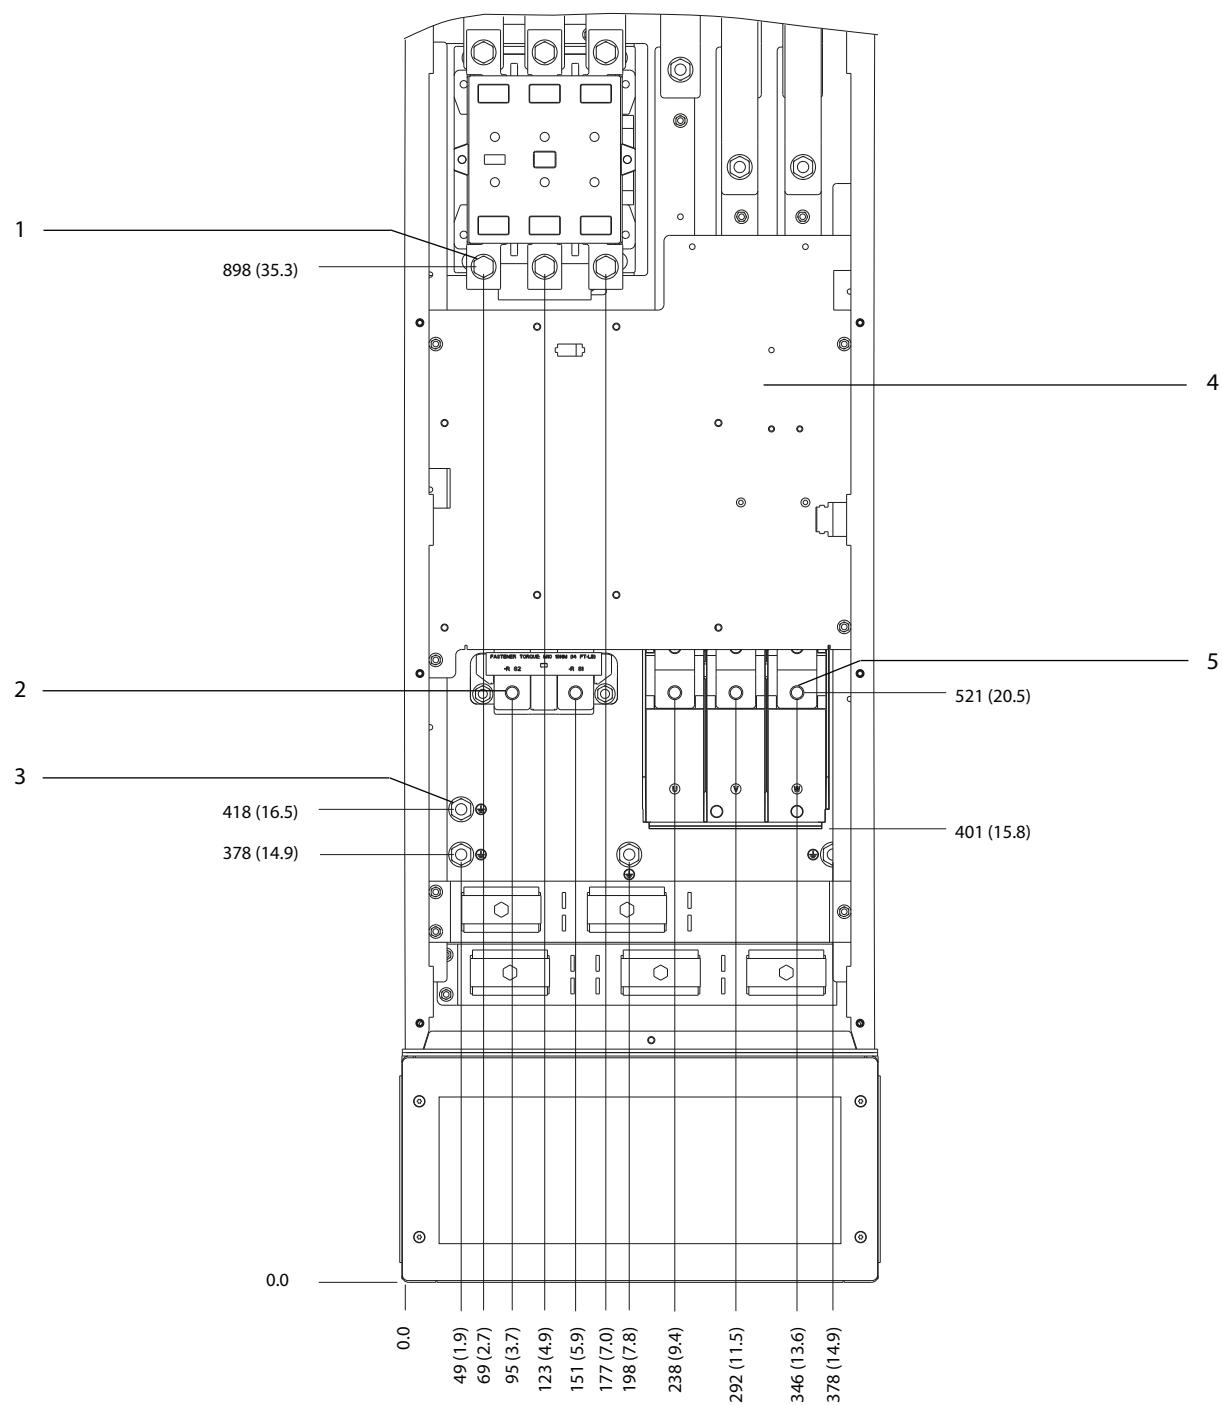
D7h Terminal Dimensions with Brake Option (Front View)
